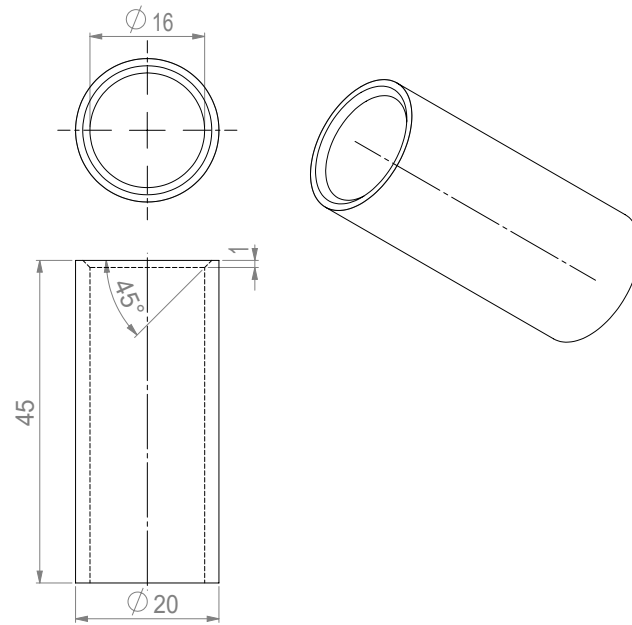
Drawing of the Cylinder with all its dimensions in mm.
